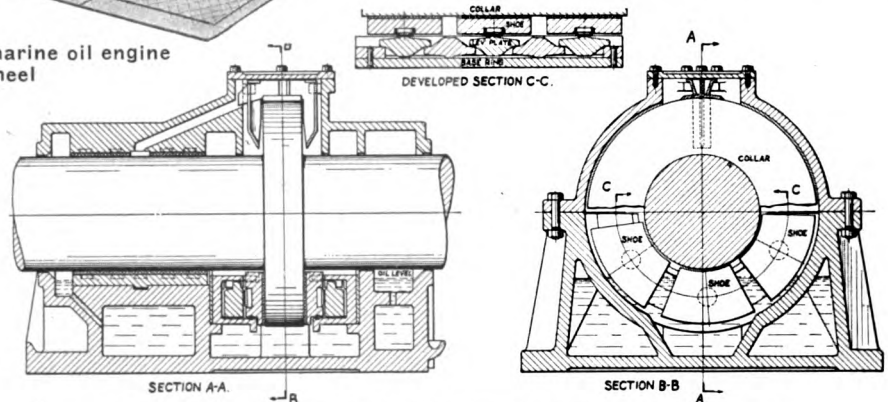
Self-contained, and self-lubricating Kingsbury bearing
